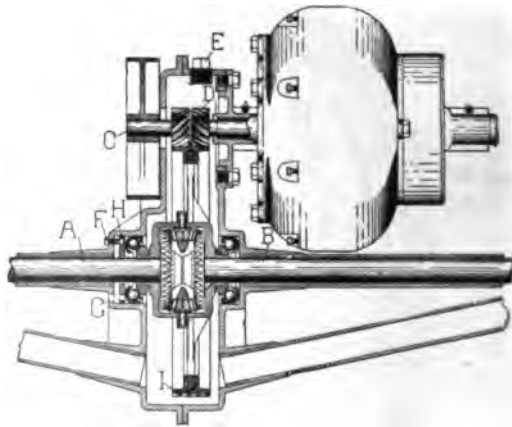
Plan Diagram of Single Motor Attached to Rear Axle Through "Herring-bone" Single Reducing Gears. A is the left-hand section of the divided rear axle; B, the right-hand section of the rear axle; C, the brake drum; D, the spiral pinion on the motor shaft driving the worm gear, I, on the differential; E, plug for greasing gears; F, set screw for locking ball race; G, slot for wrench to adjust threaded ring, H, against ball bearings.
